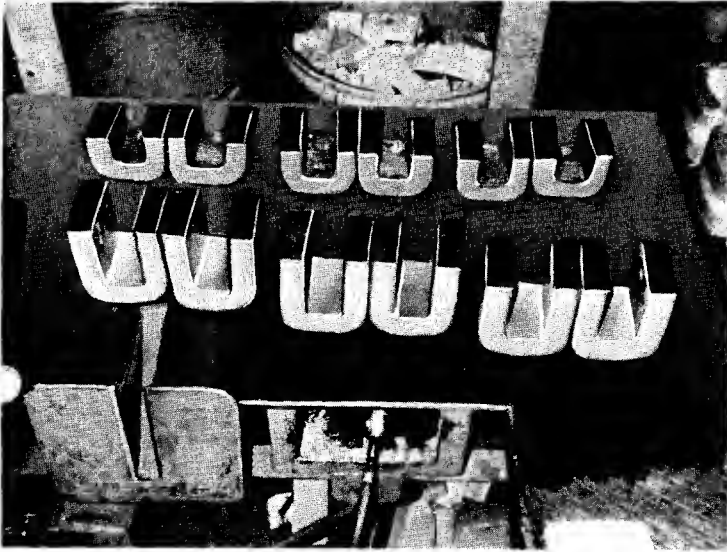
Cores laid out for assembly—bottom yoke insulation in place
